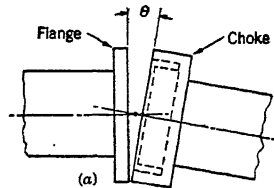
Hinge or Knuckle Joints (Courtesy McGraw-Hill Book Co.)
